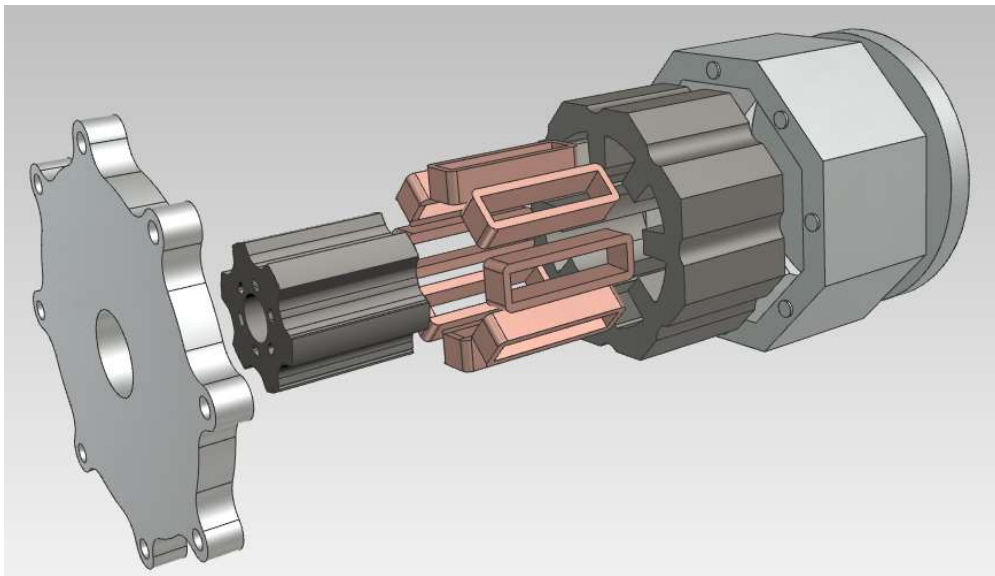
Exploded view of the Final Design for the 8/6 SRM
